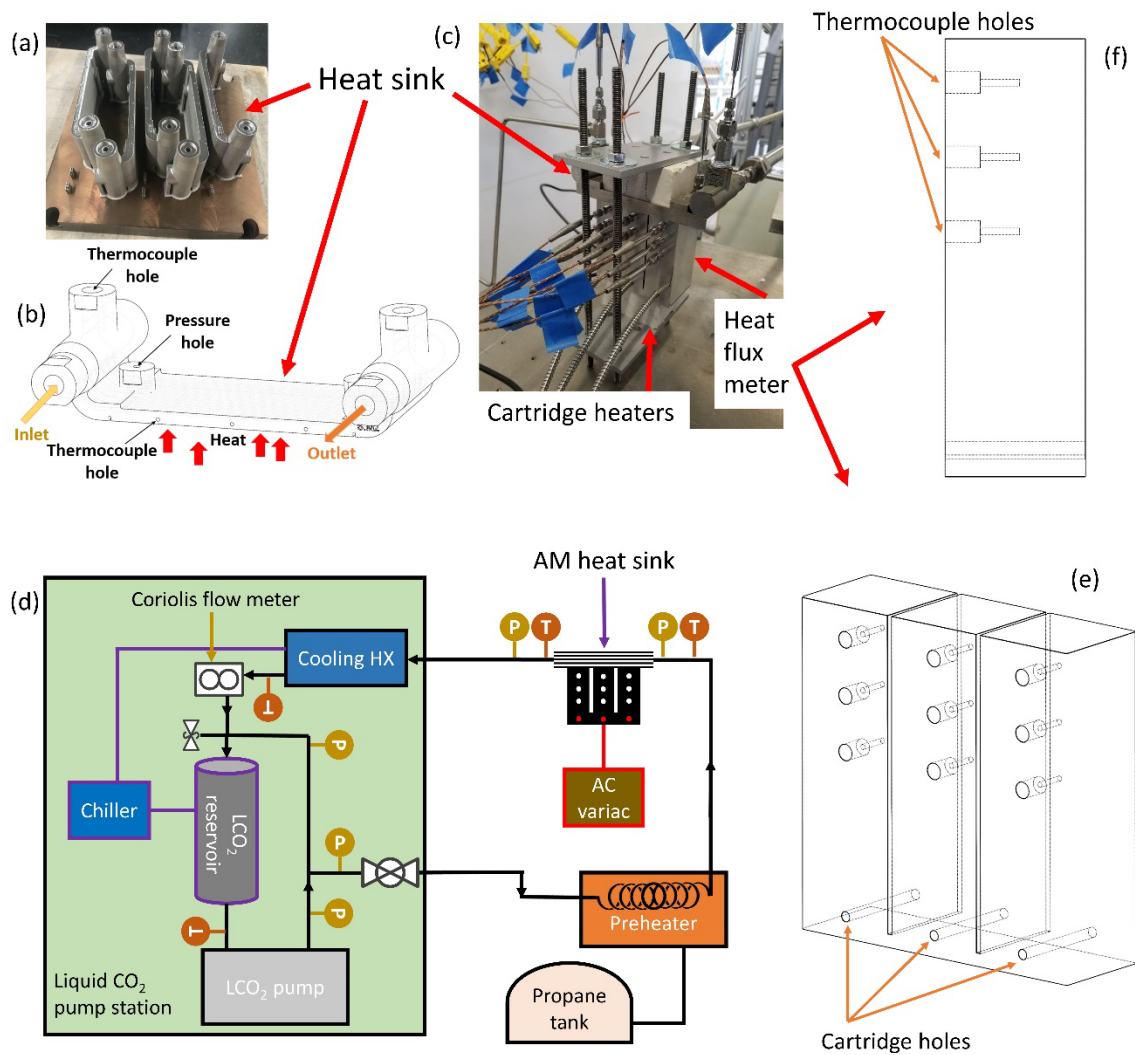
(a) AM heat sink attached to the build plate, (b) AM pin array heat sink design, (c) heat sink and fluxmeter assembly, (d) heat transfer test experimental setup line schematic, (e) isometric and (f) side view of the flux meter.
